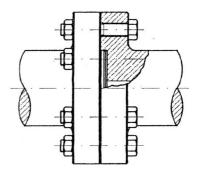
Blank Flange Coupling (Kurzawa, 1993)
